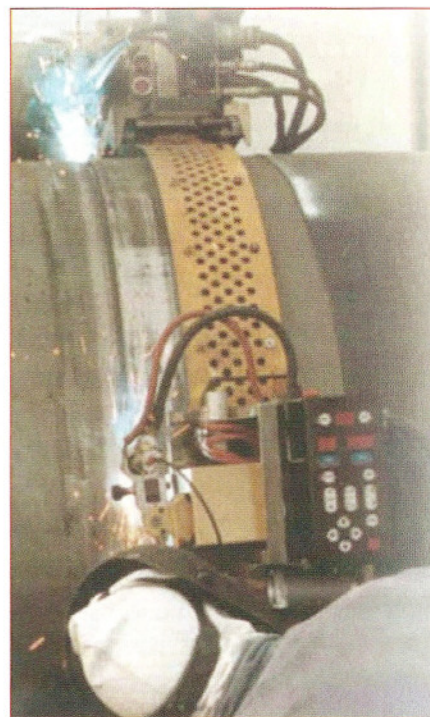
Gas metal arc girth welding equipment in operation. (Photo courtesy of VIETZ GmbH.)
